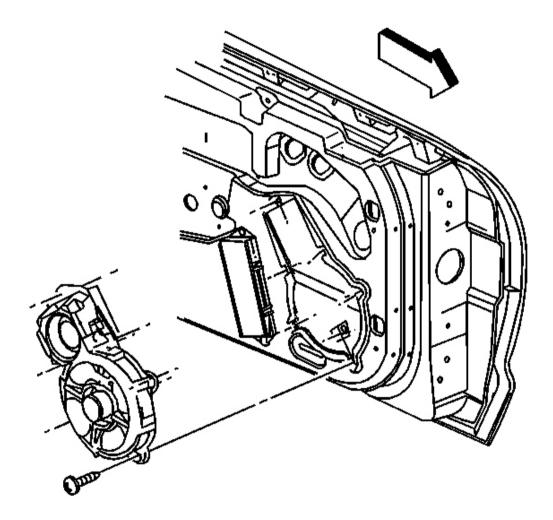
Front Door Speaker Assembly And Screws Courtesy of GENERAL MOTORS CORP.
